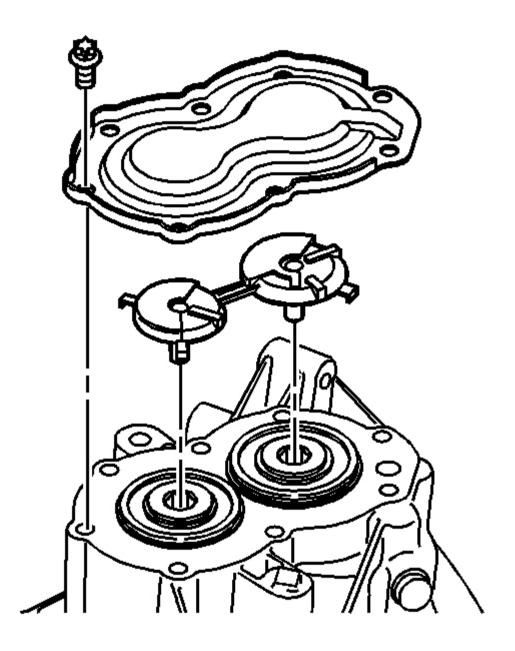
Rear Cover & Bolts Courtesy of GENERAL MOTORS CORP.
